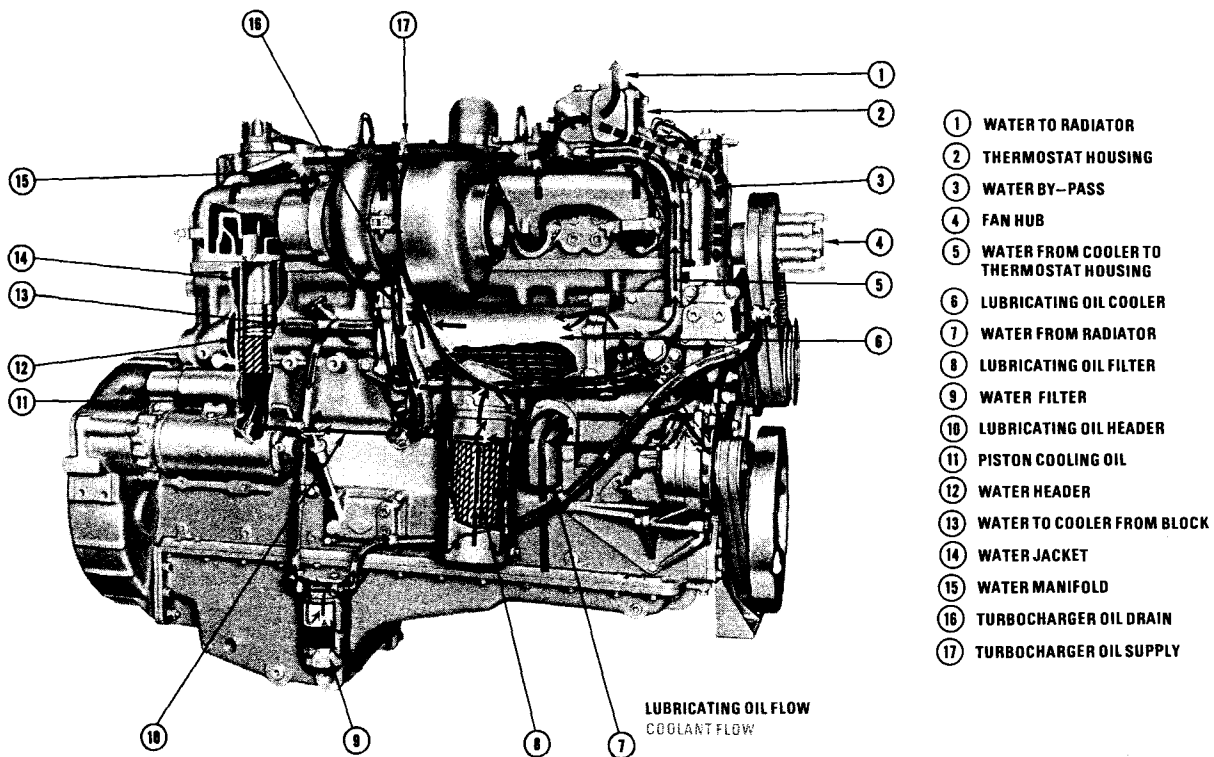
, (LWC-18). Lubricating oil and coolant flow Inline Engine
